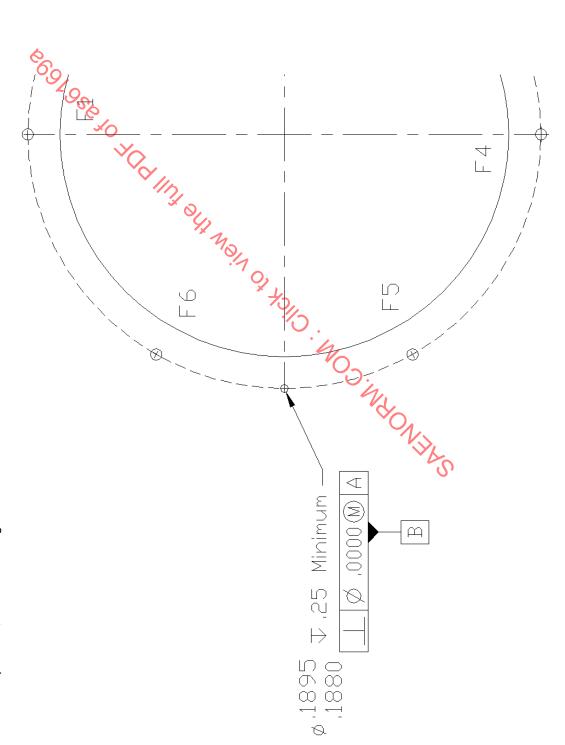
DOWEL PIN HOLE FROM PLATFORM INTERFACE, TURRET CLASS II, ACCESS HOLE EXAMPLE
